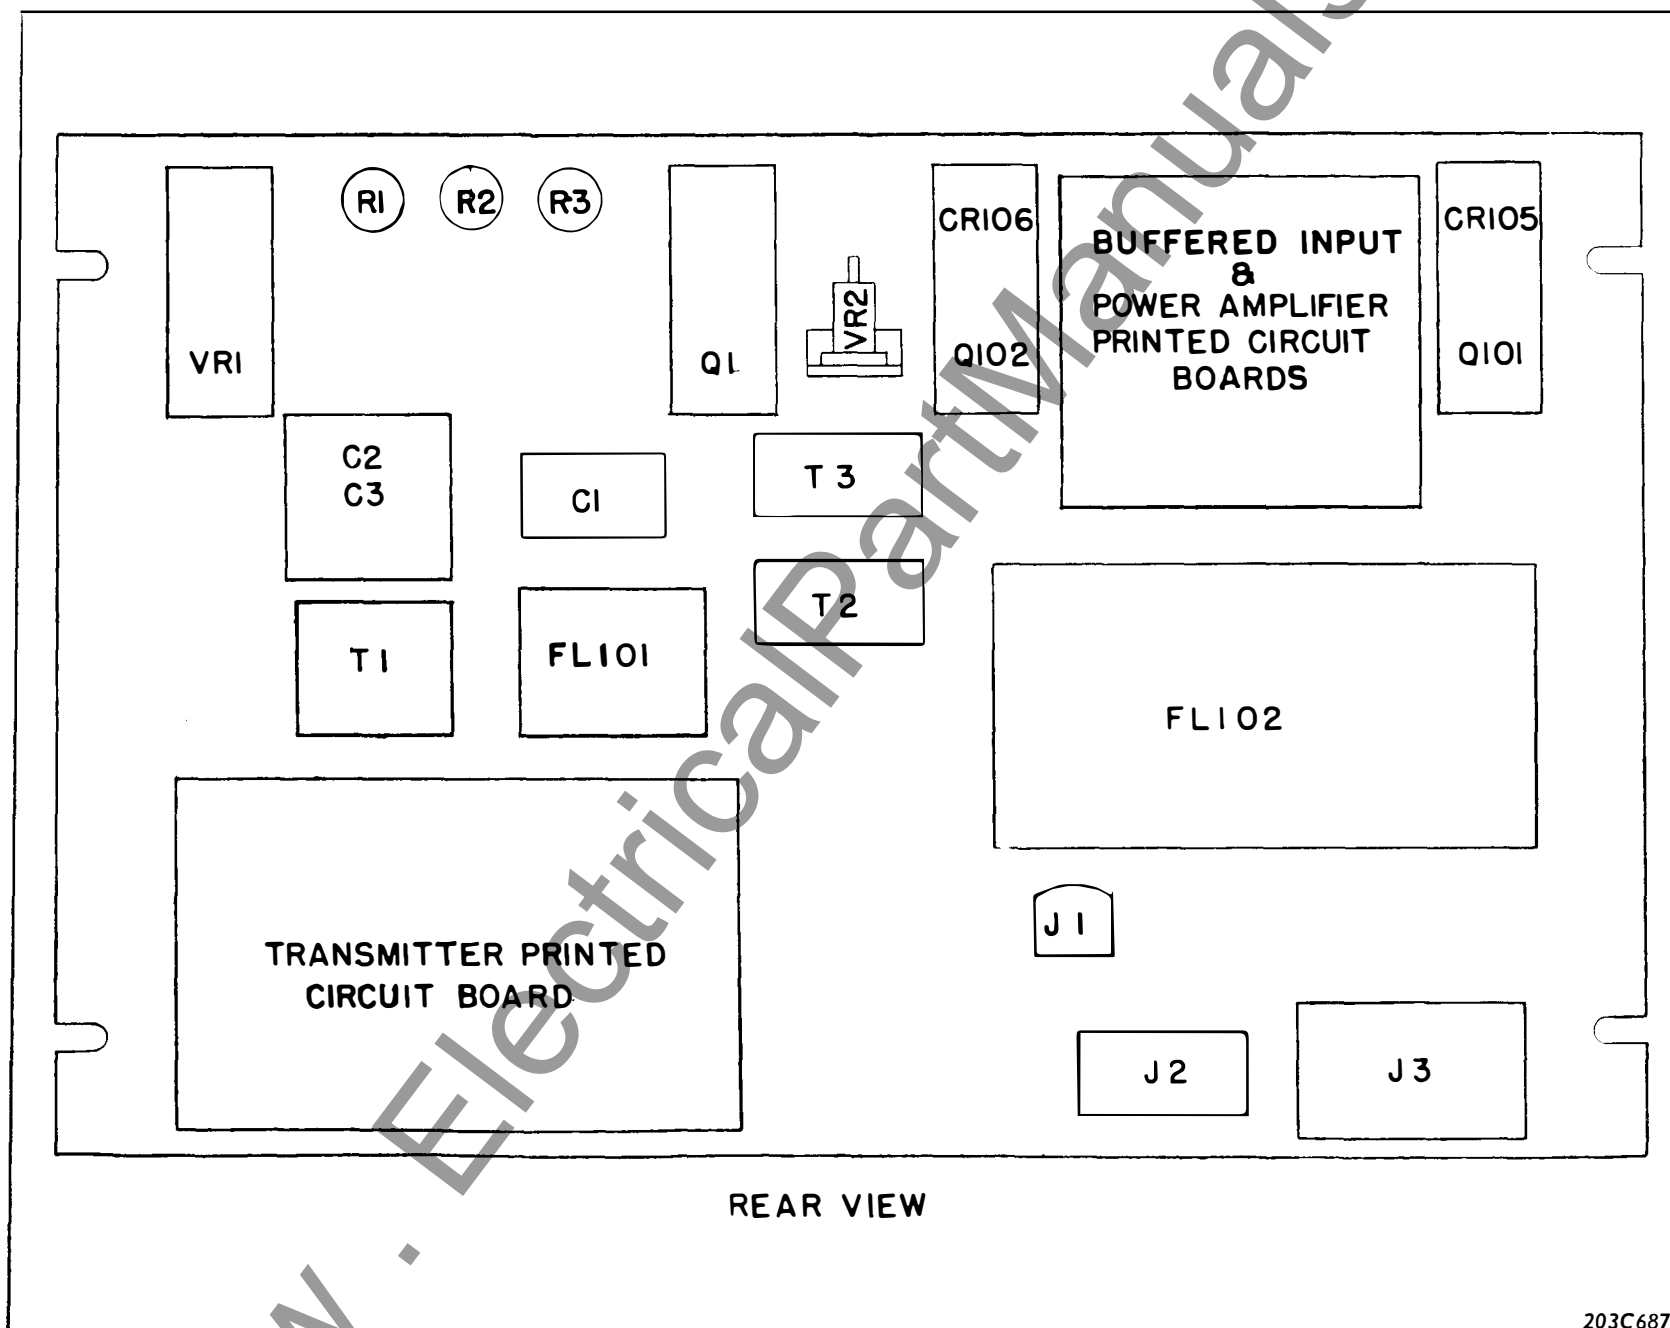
Component locations of the type TCF Transmitter Assembly.
